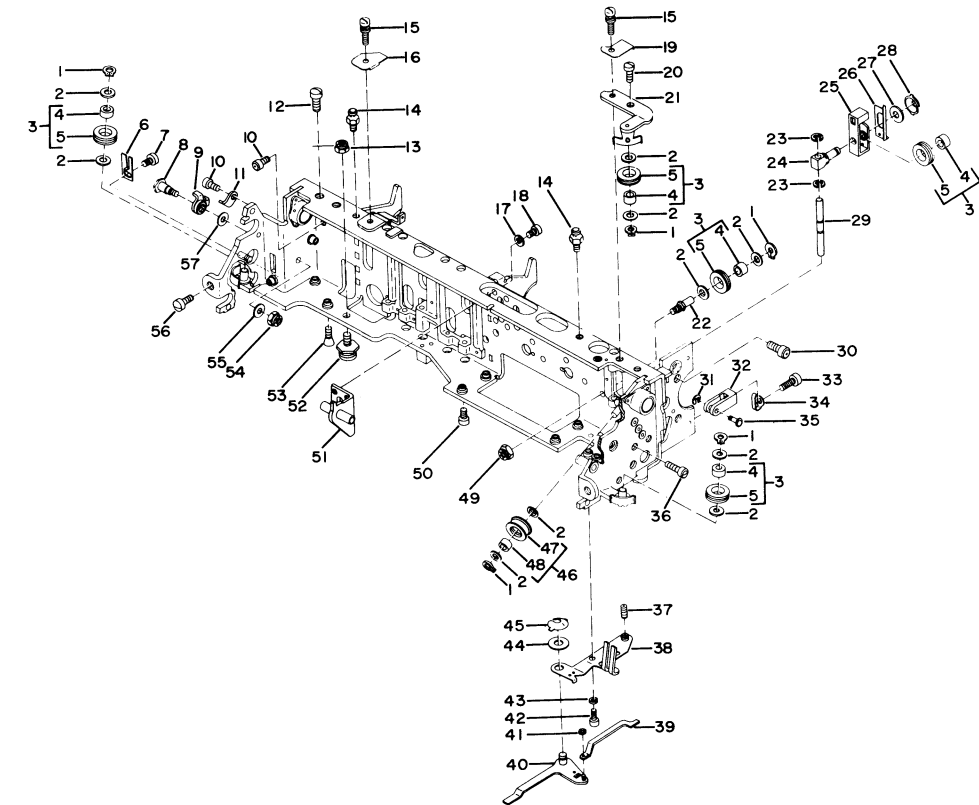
Mark and Space Clutch Release Shaft, Timing Cam Shaft, and Backstop Shaft Assembly
